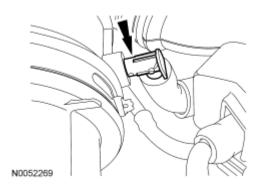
Locating Brake Booster Vacuum Hose Courtesy of FORD MOTOR CO.
